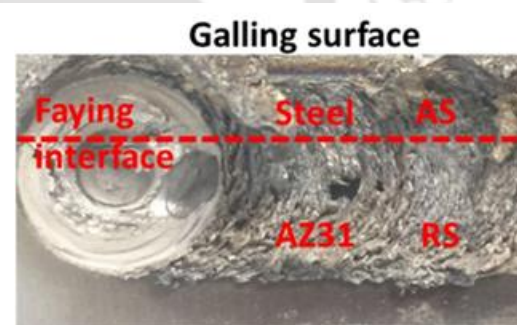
Experimental investigation of surface galling defect for dissimilar FSW (Wang *et al.*, 2019)
